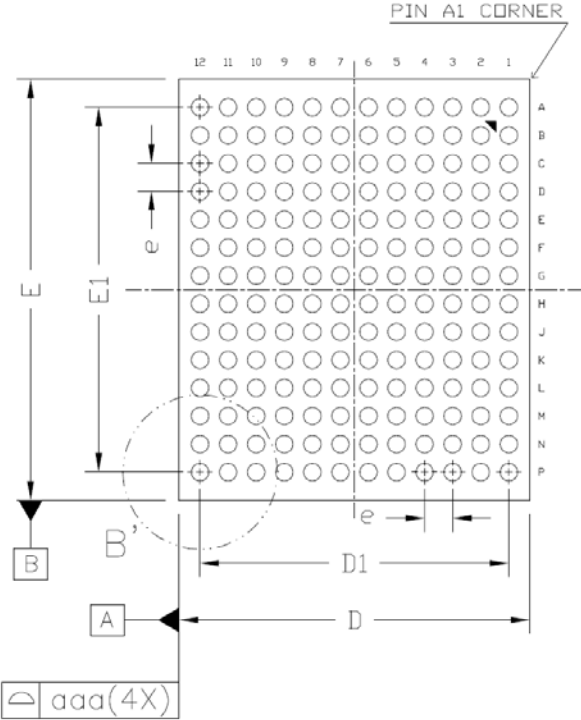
168-pin 10 mm x 12 mm HFCBGA Bottom View
